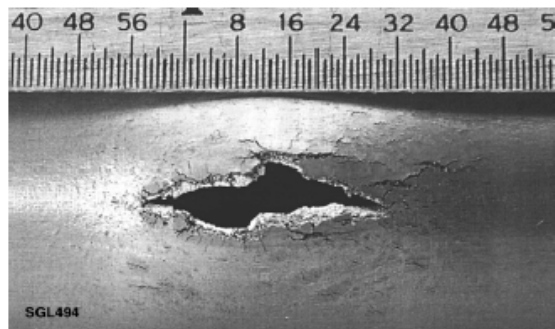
Typical rupture of a steam generator tube after crack coalescence.
